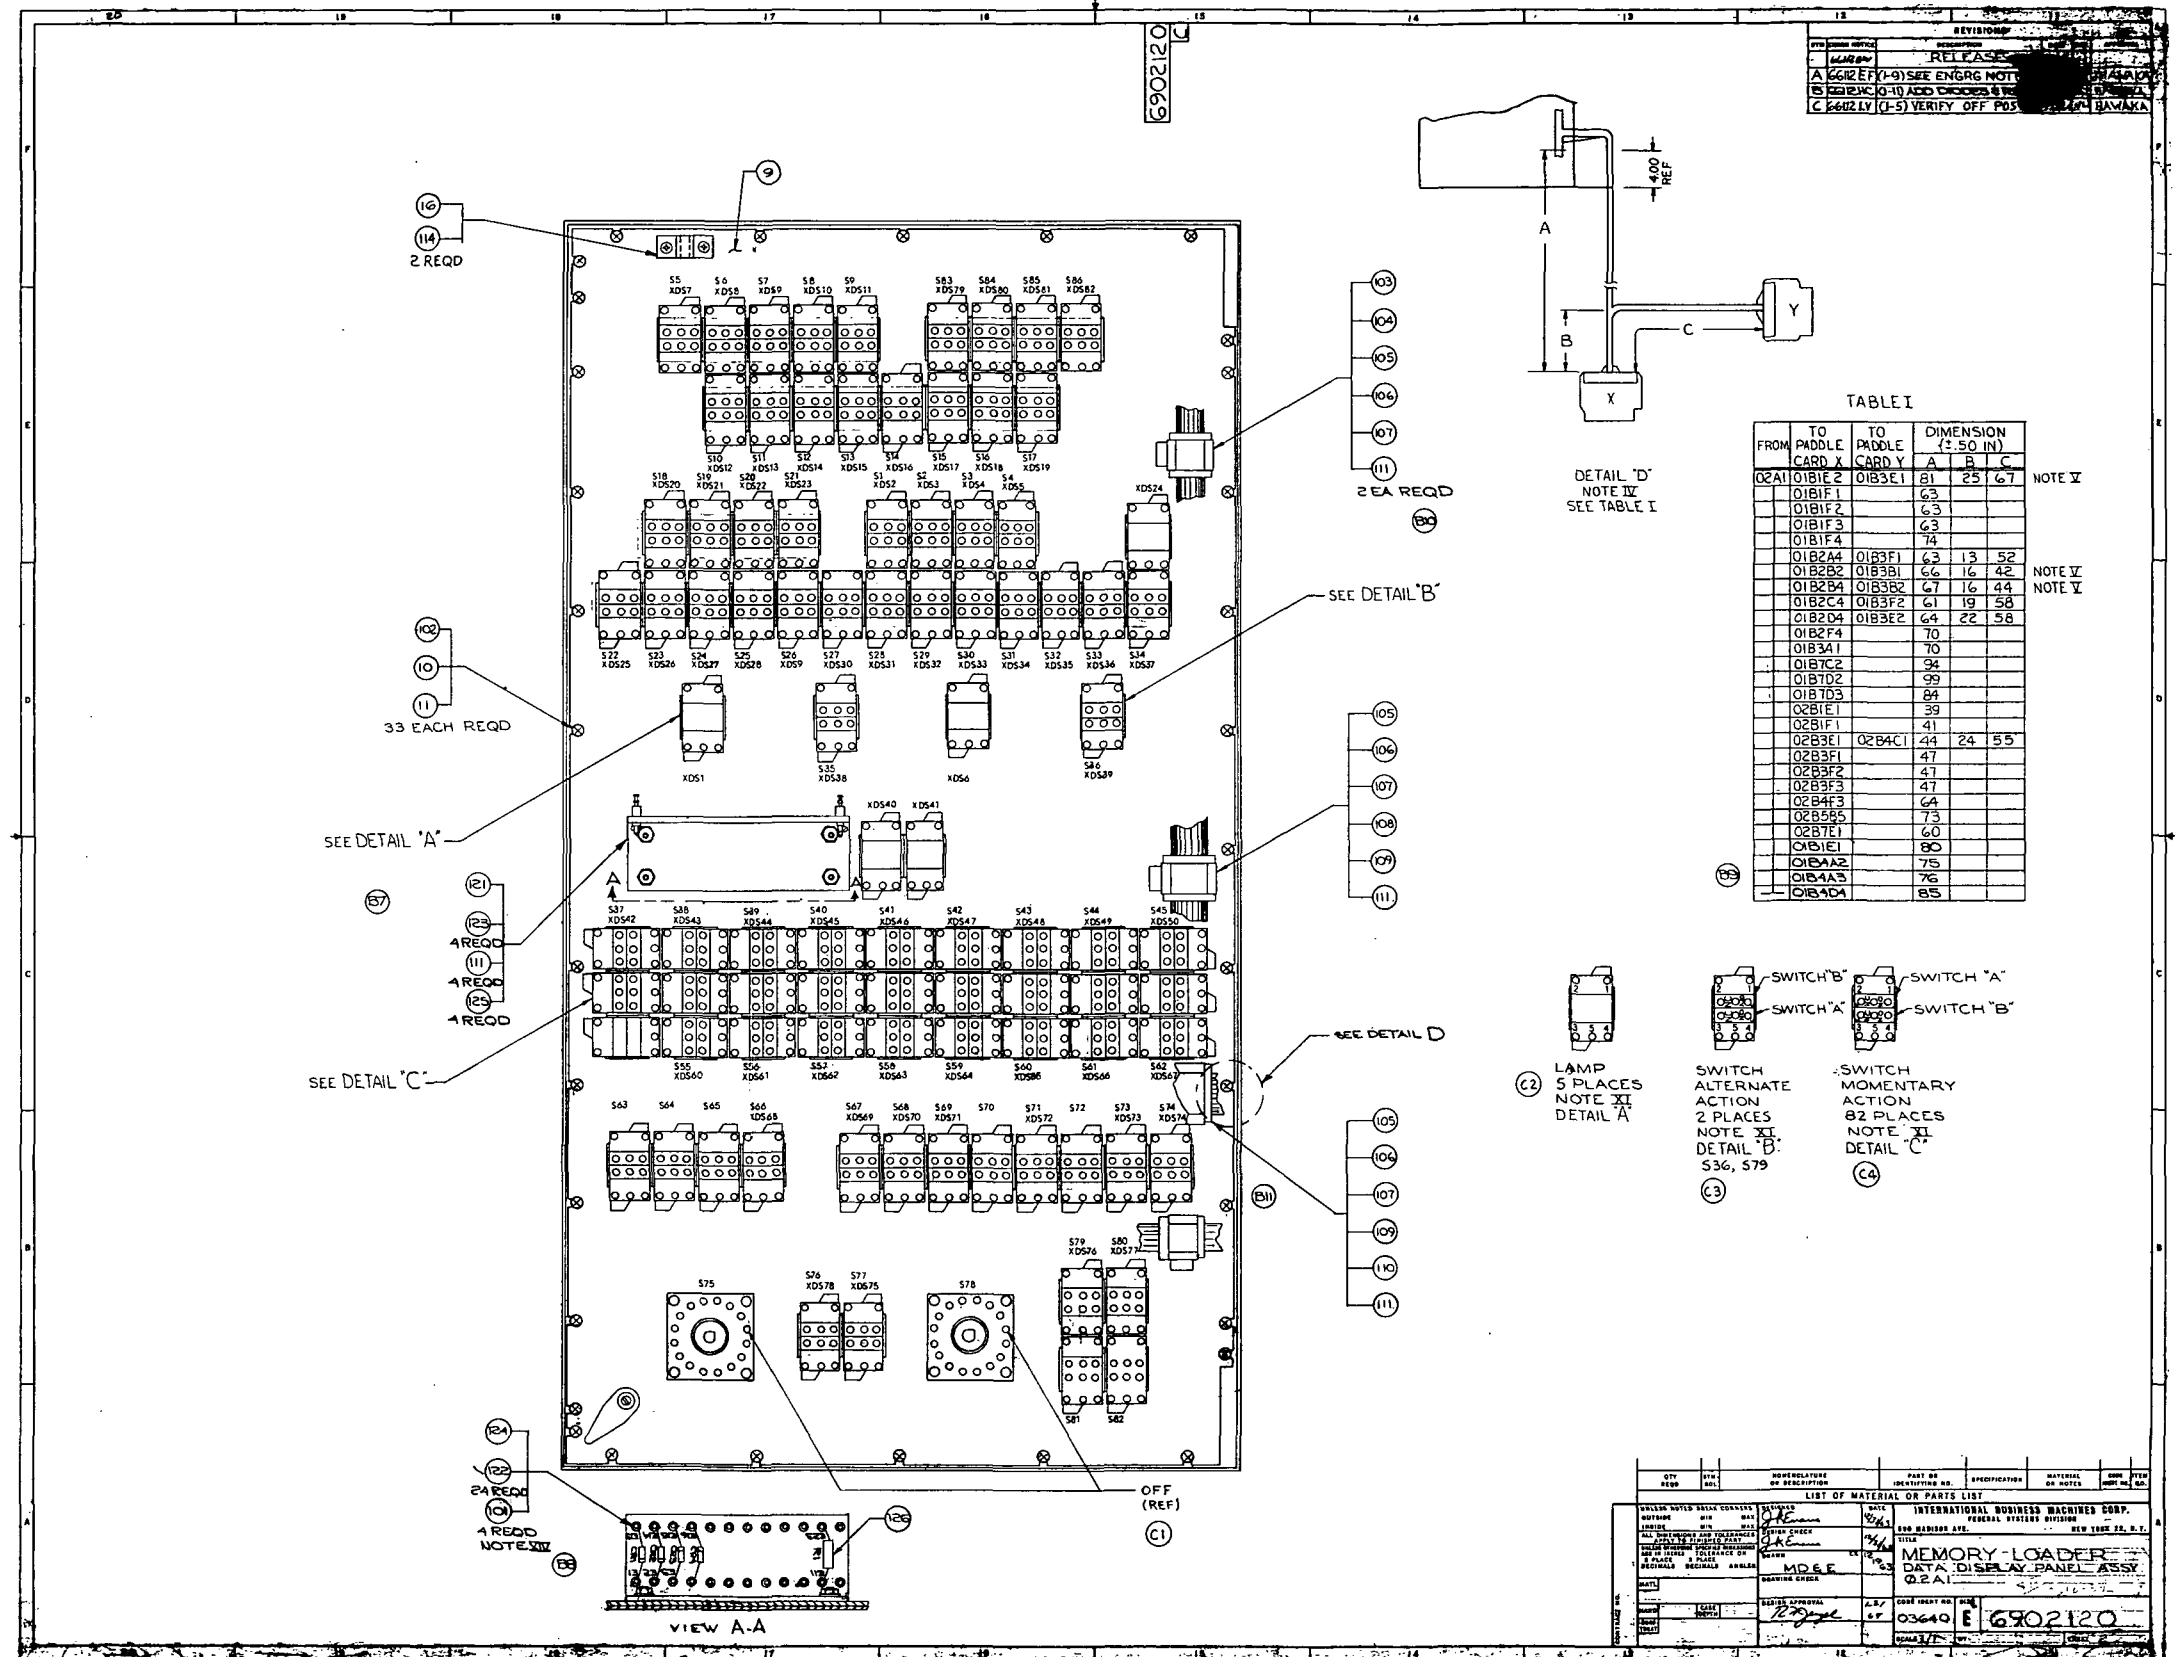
Memory Loader and Data Display Panel (02A1) Assembly Drawing (Sheet 2)
